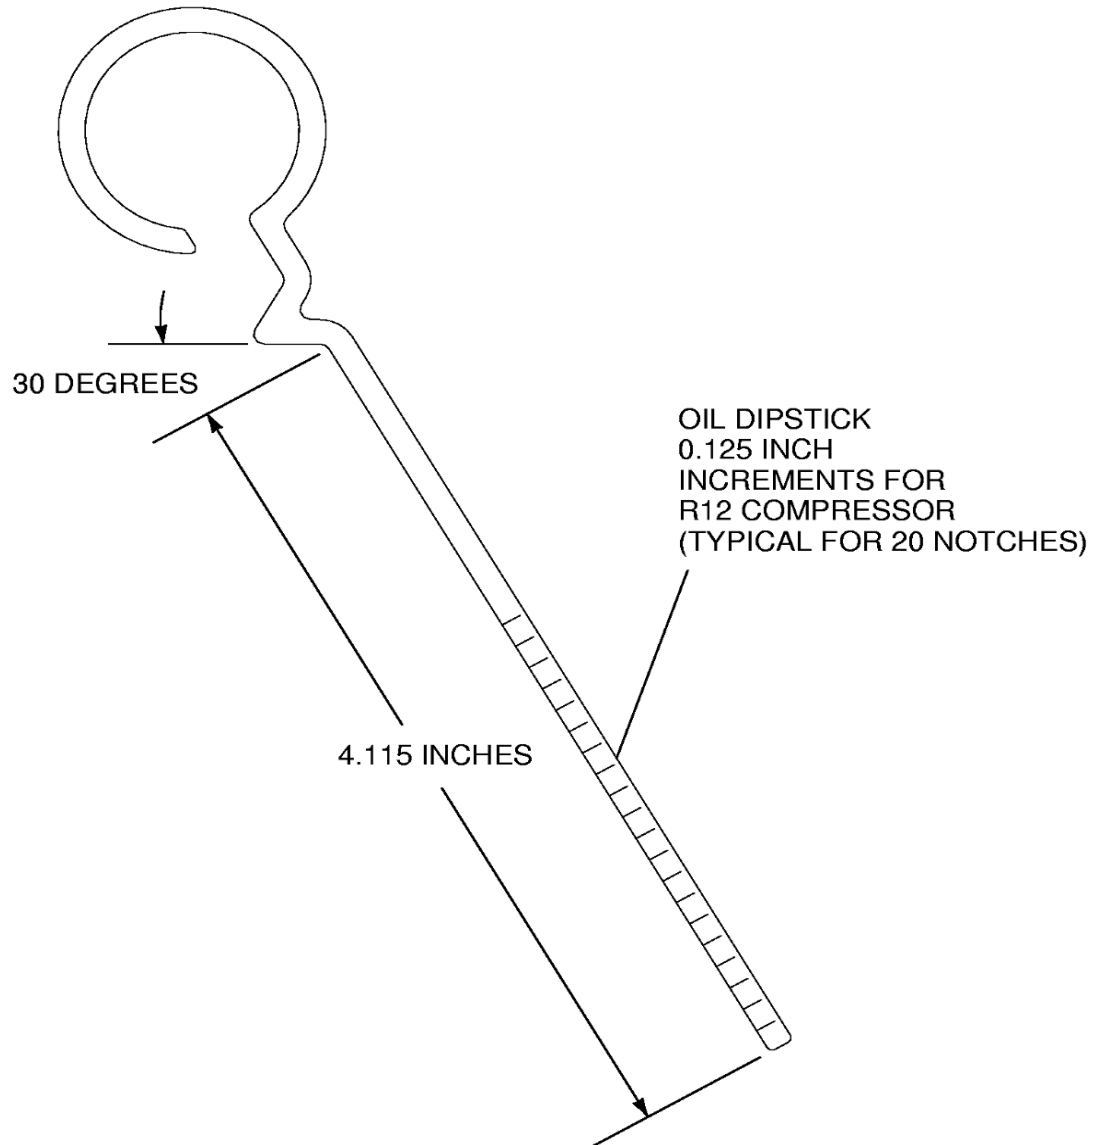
Sheet 2 : Checking Compressor Oil Level
